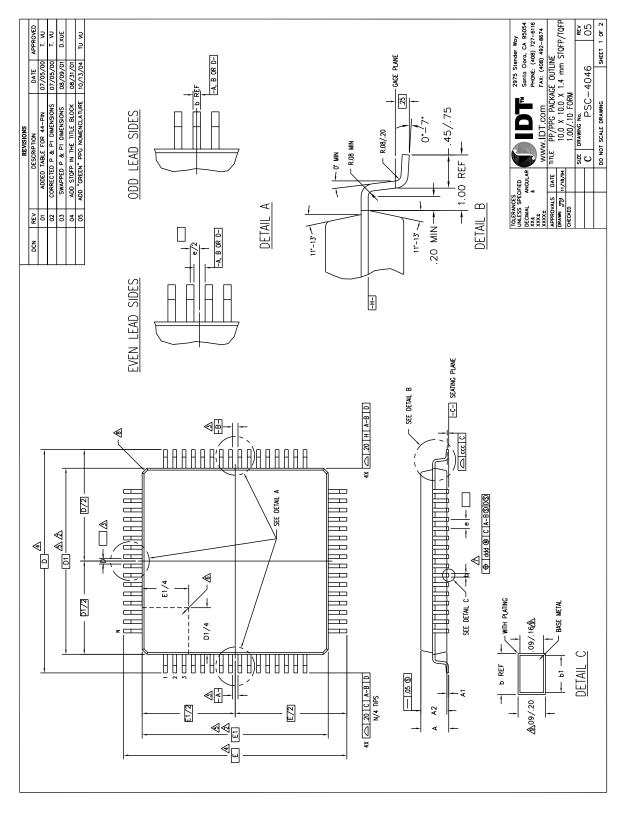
64-Pin PP Package Dimensions (a) (in Millimeters)
